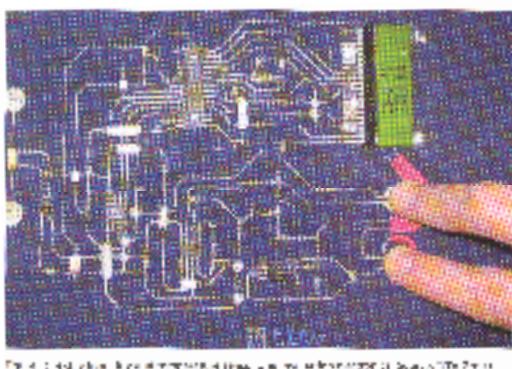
Printed circuit board showing integrated sensors and actuators. Source: AZOO1.ppt
